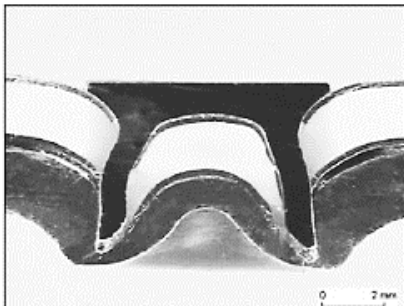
Using self-pierce riveting to joining three-layer sheet [11]
